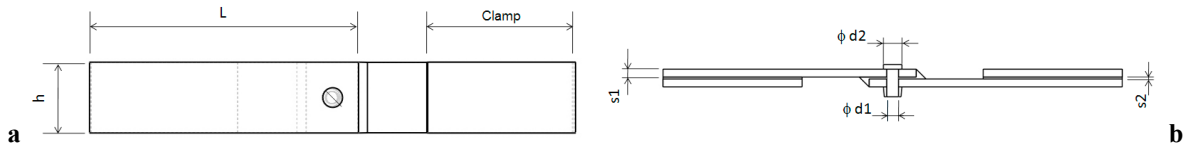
(a) Top view and (b) side view of the single-lap joint.
